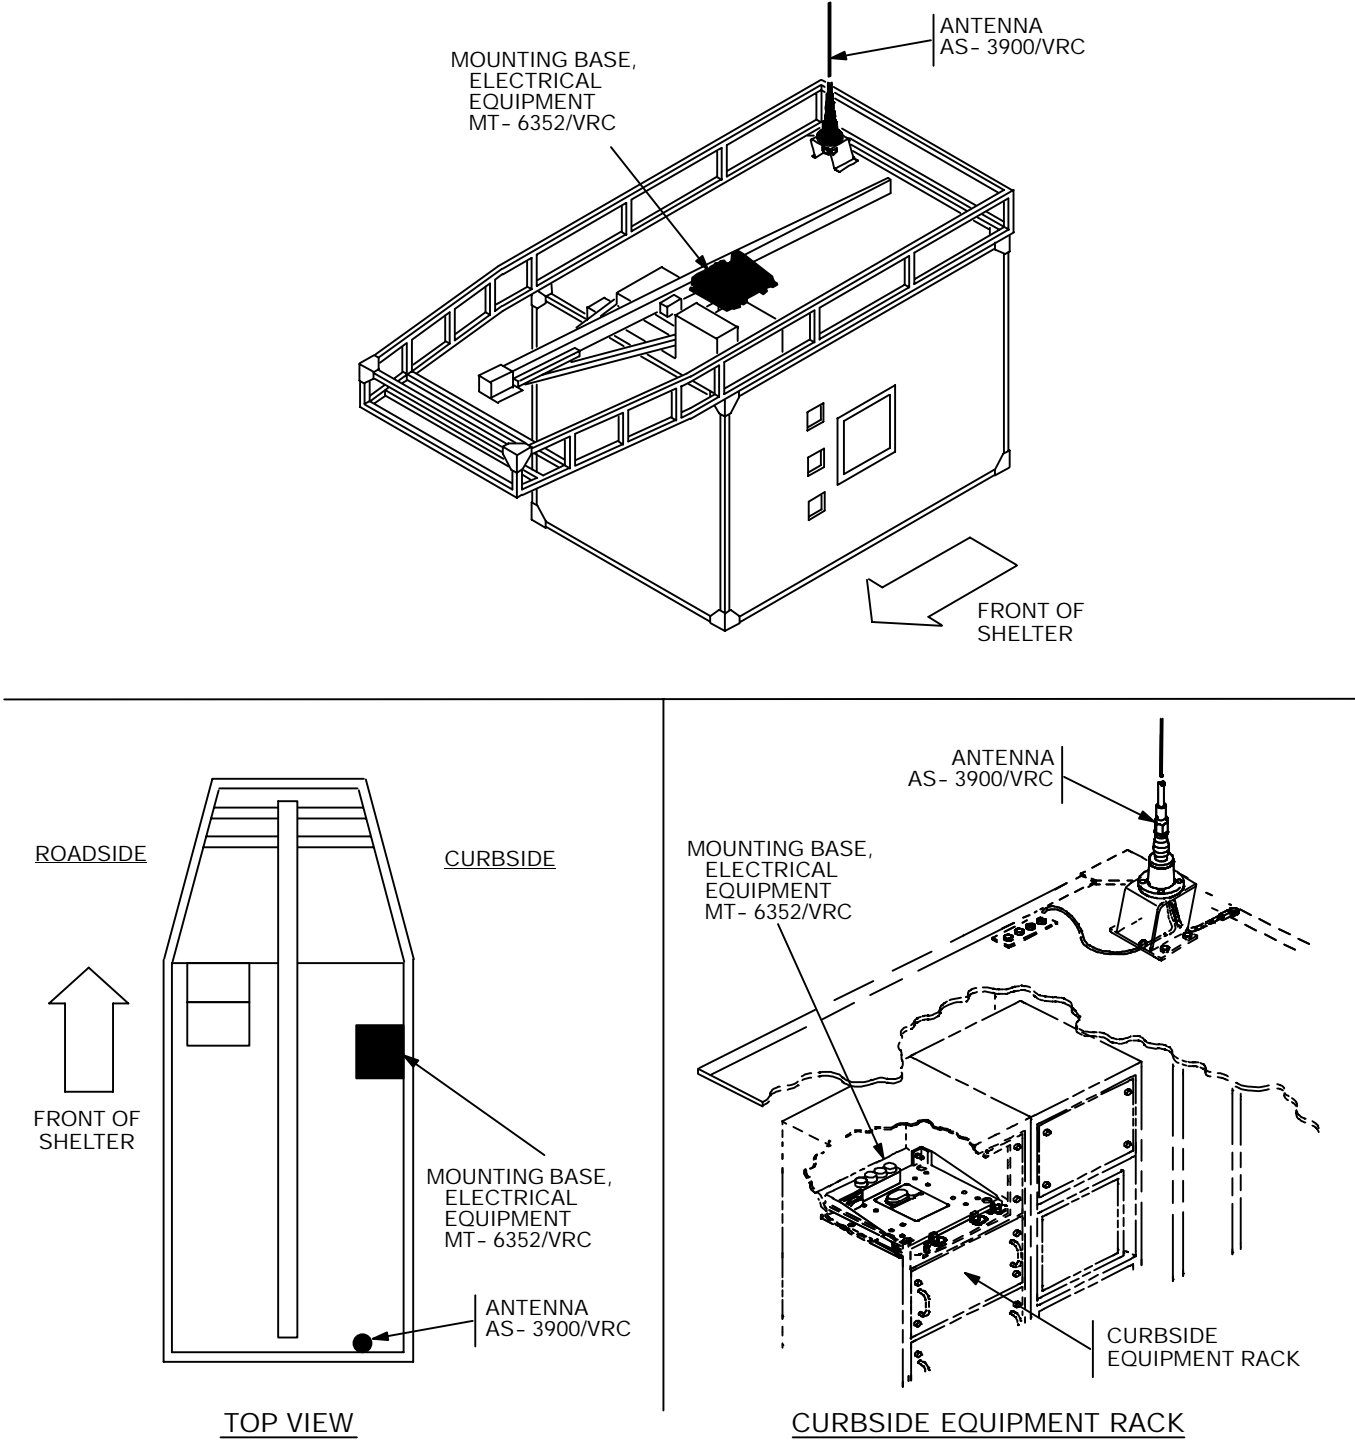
1 (1). MK and Radio Installation: MK Equipment Locations
